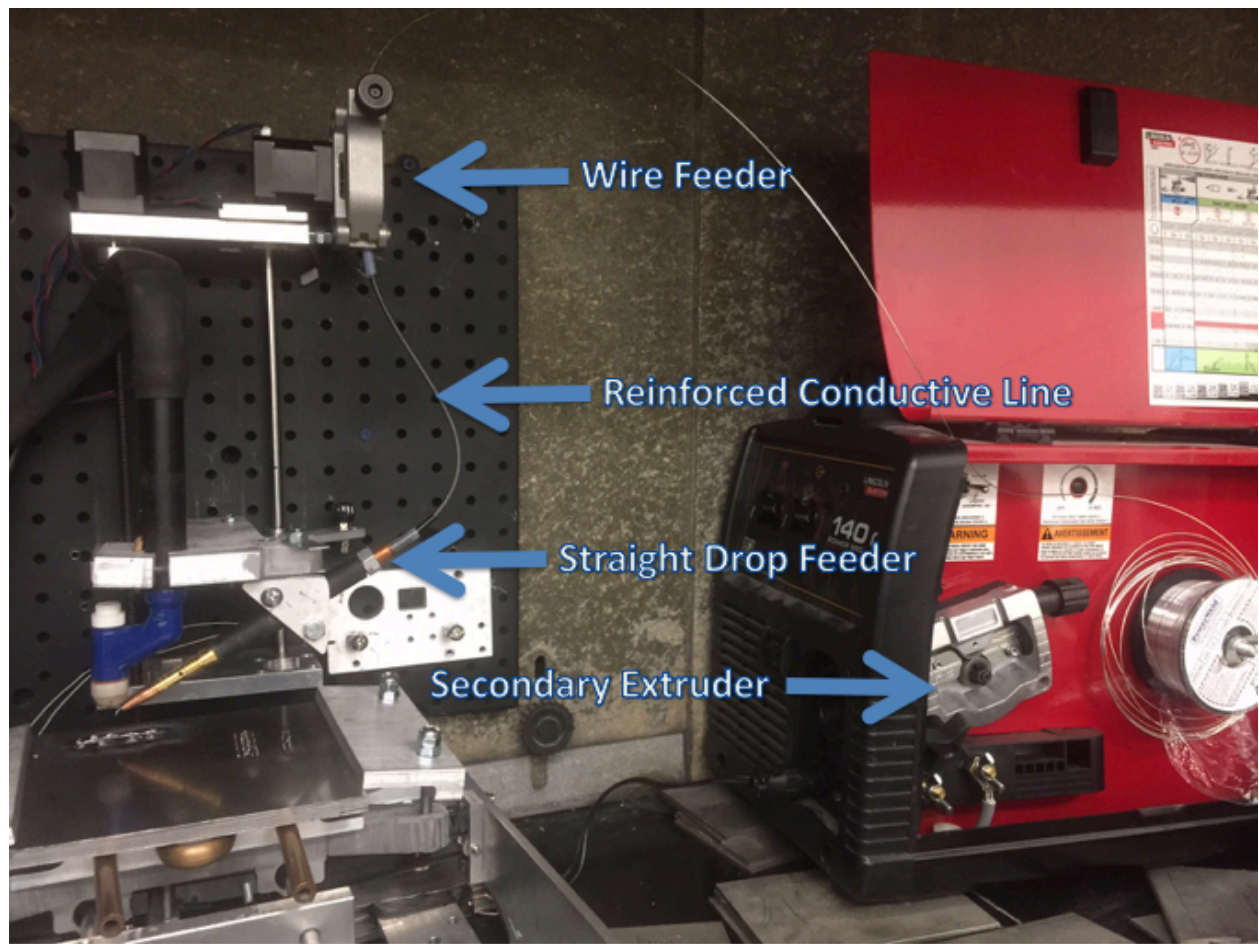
Modifications required for the use of filler wire od OD>1mm. “Wire Feeder” being the original 5V stepper motor, while “Secondary Extruder” refers to the 12V motor.
